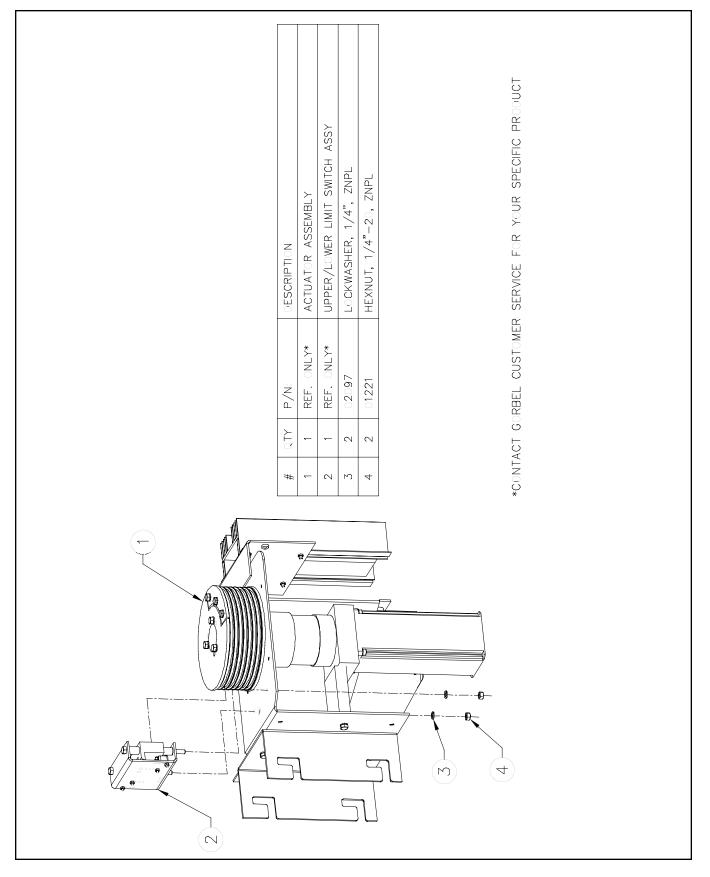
Limit Switch Assembly to Actuator Frame Mounting.
